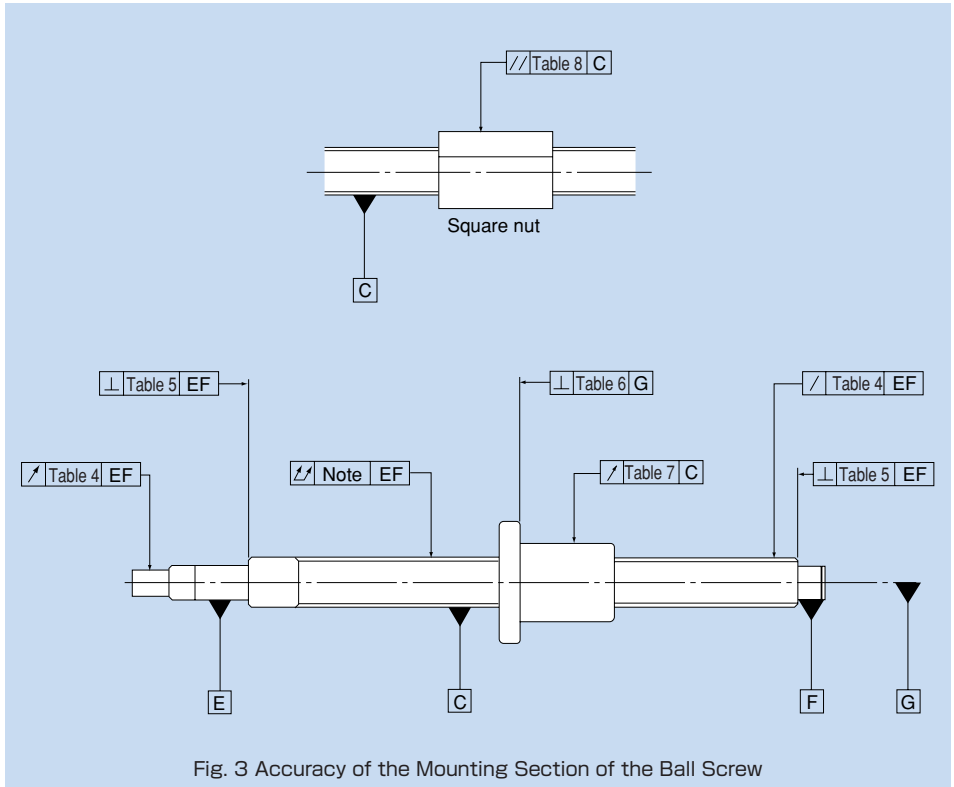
Accuracy of the Mounting Section of the Ball Screw
